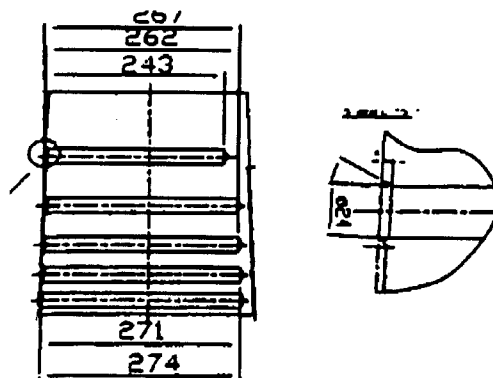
(15) TIG welding of Plugs for toroidal header holes
